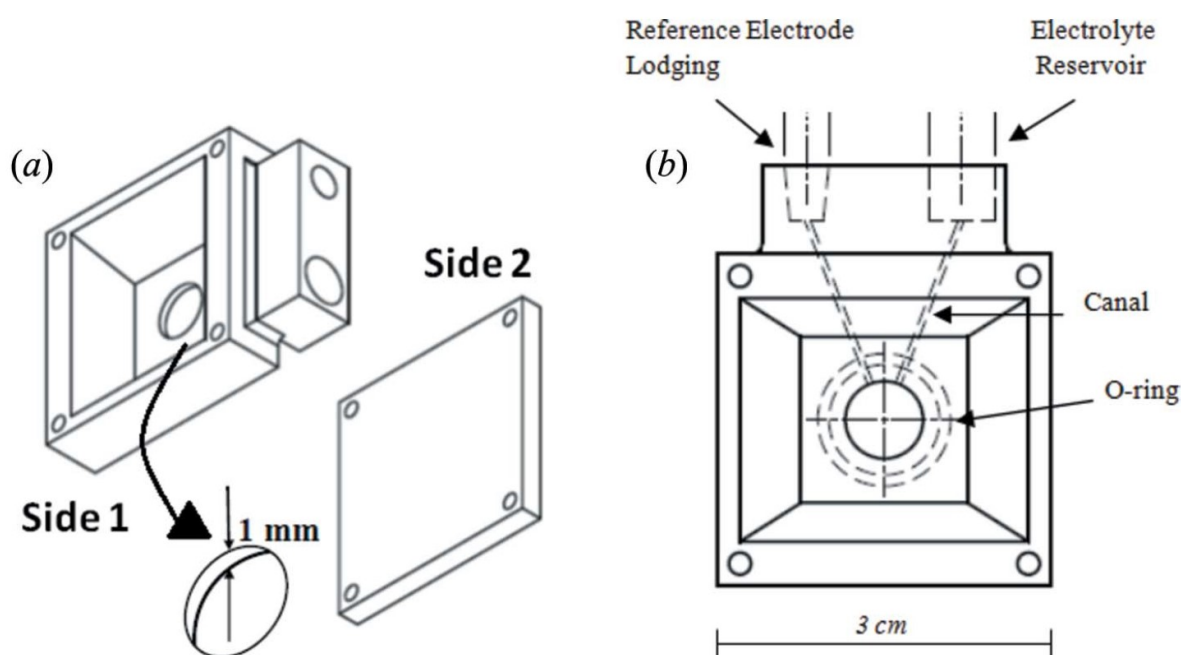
Design of cell type A: rectangular plate and cover with hole (a) and schematic representation of the canals connecting the reference and counter electrodes holders to the inner part of the cell (b).
